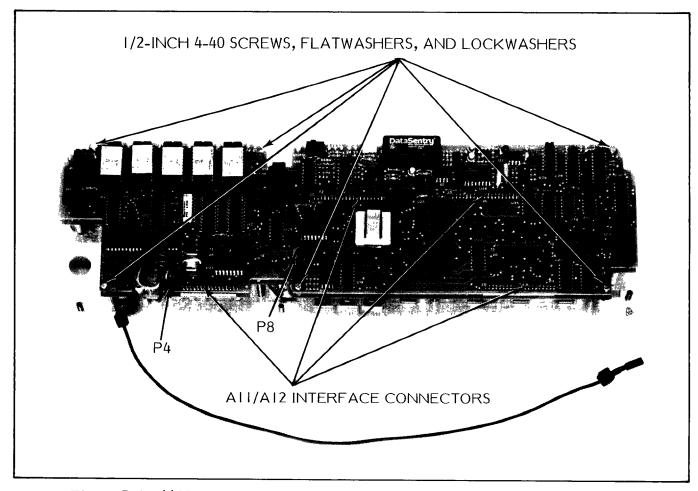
6600 Series Programmable Sweep Generator, Front Panel Assembly
